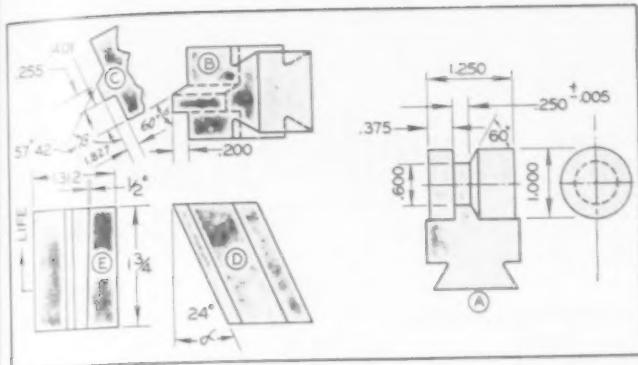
Dovetail forming tool, which has the advantages of longer life and easier replacement after sharpening.
